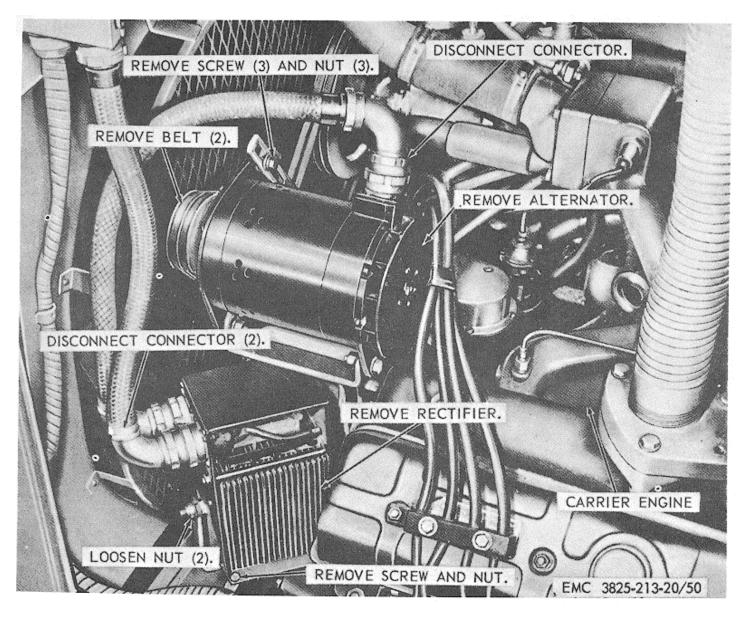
Alternator drive belt, alternator, and rectifier, removal and installation.
